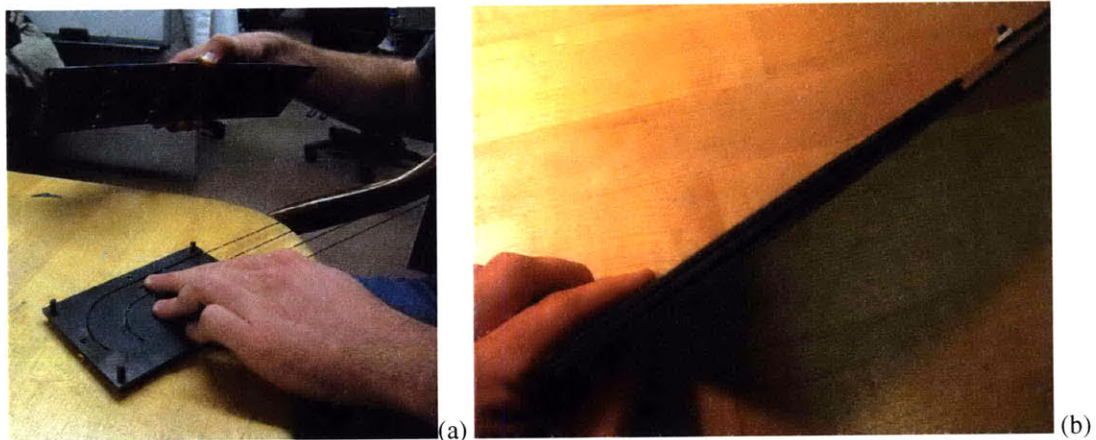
Assembly of quench fixture (a), and bowing observed after quench. (b)
